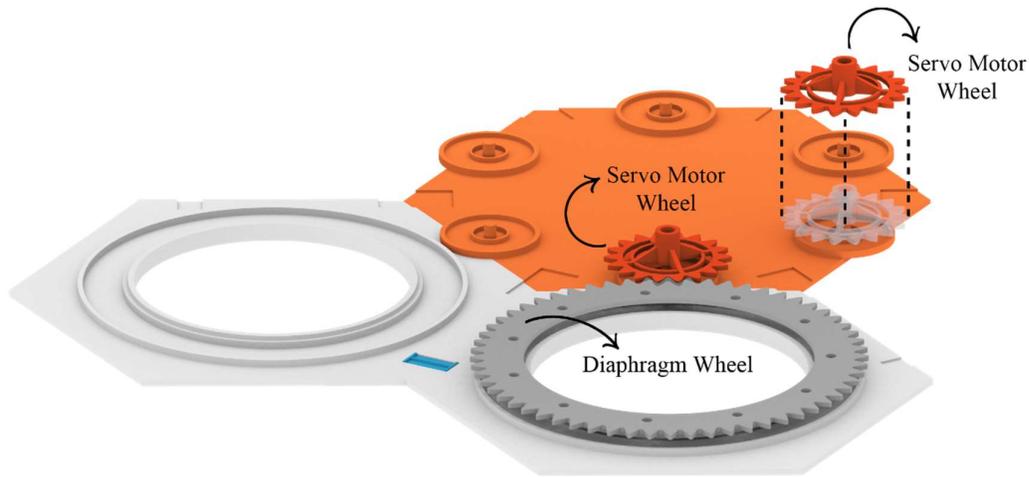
Assembly of servo motor wheel and diaphragm wheel.
